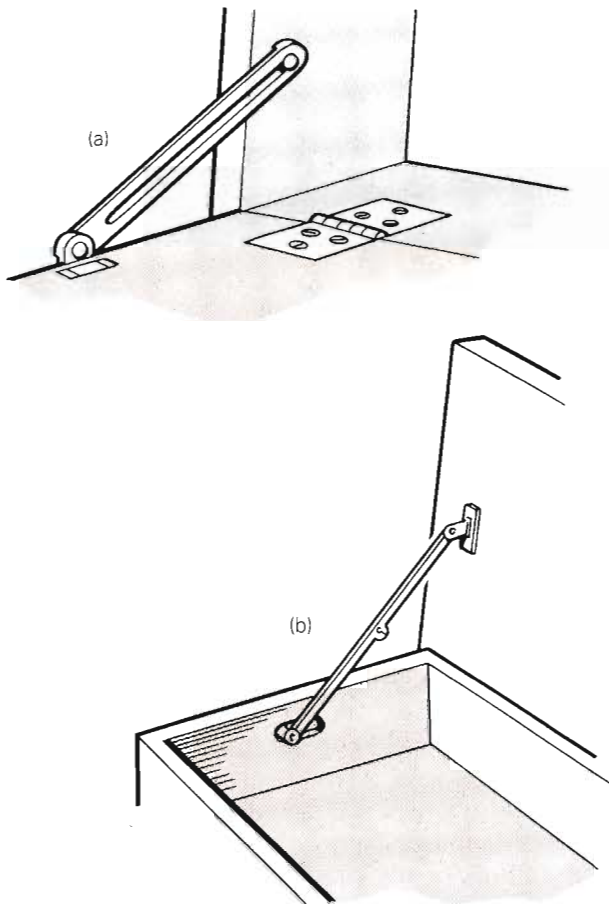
Types of stay: (a) sliding stay, (b) folding stay.
